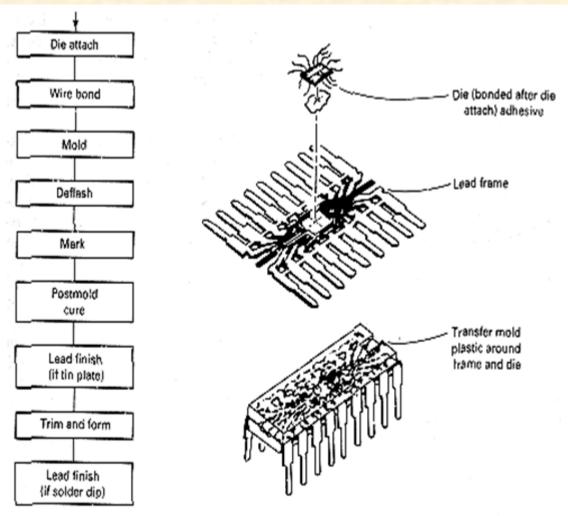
Assembly sequence for plastic postmolded dual-in-line package. The lead frame serves as the chip carrier after die bond and wire bond.
